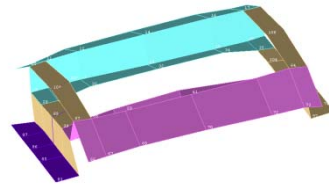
Experimental set-up for the full welded structure with bolted joints.
